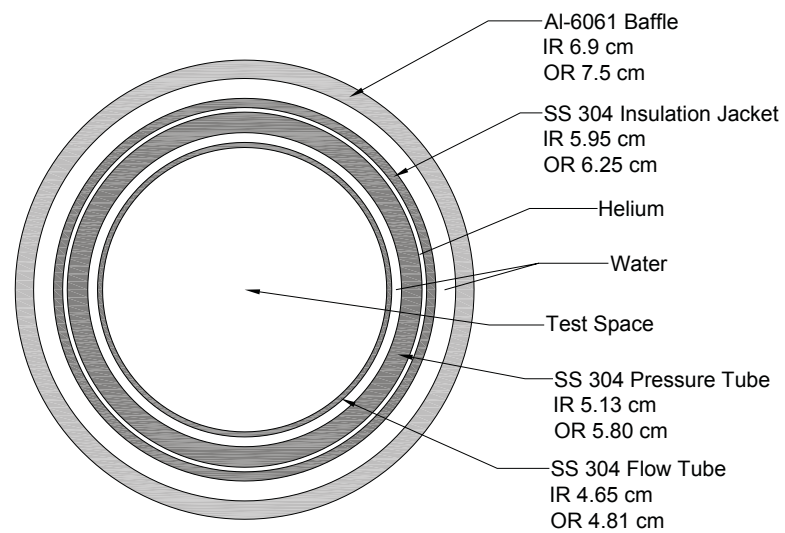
Diagram of in-pile tubes (IPTs) specified for cylindrical-type core.
